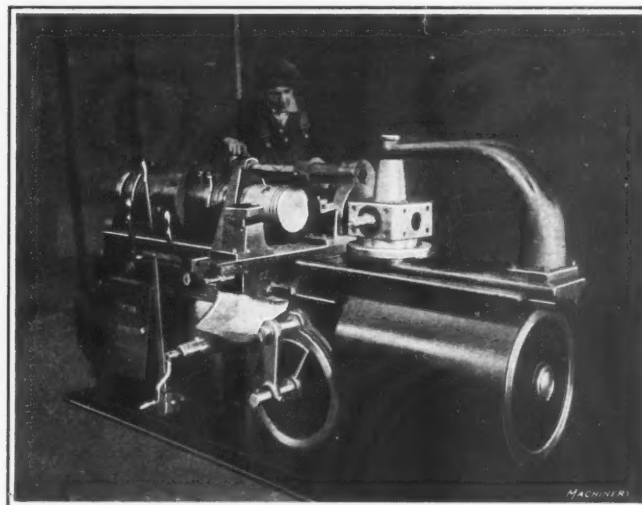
Potter & Johnston Automatic Lathe turning Pistons
